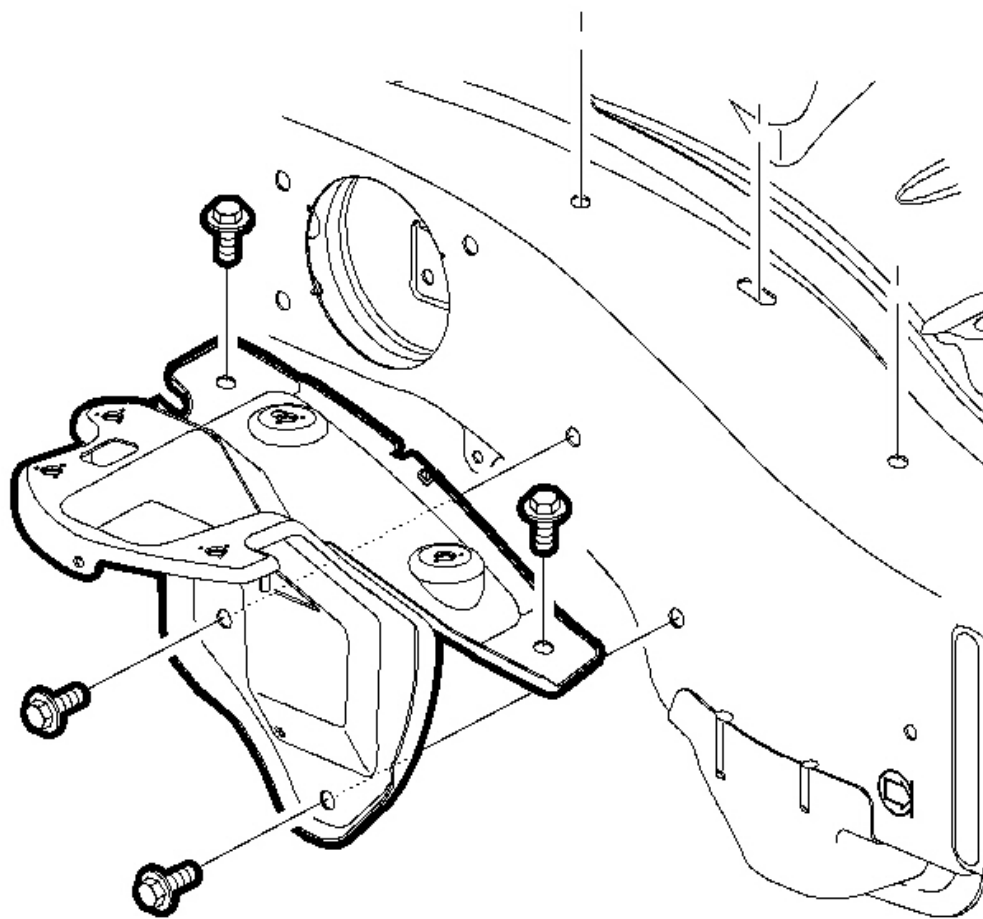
Installing Headlamp Assemblies & Torque Bolts
